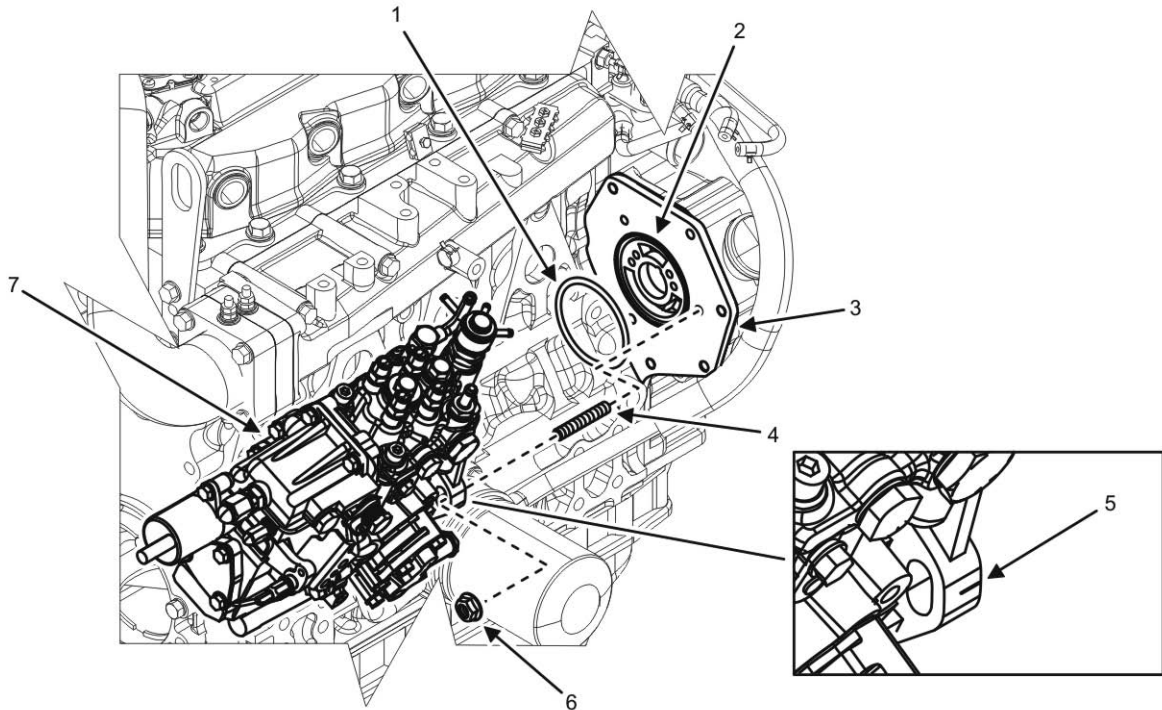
Fuel Injection Pump and Mounting Flange Adjustment.
